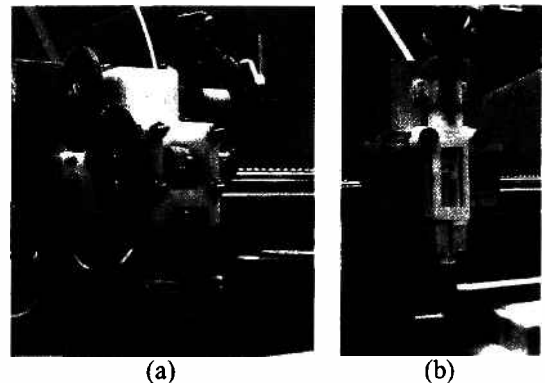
(a) Wire-fed tool, (b) syringe extruder
